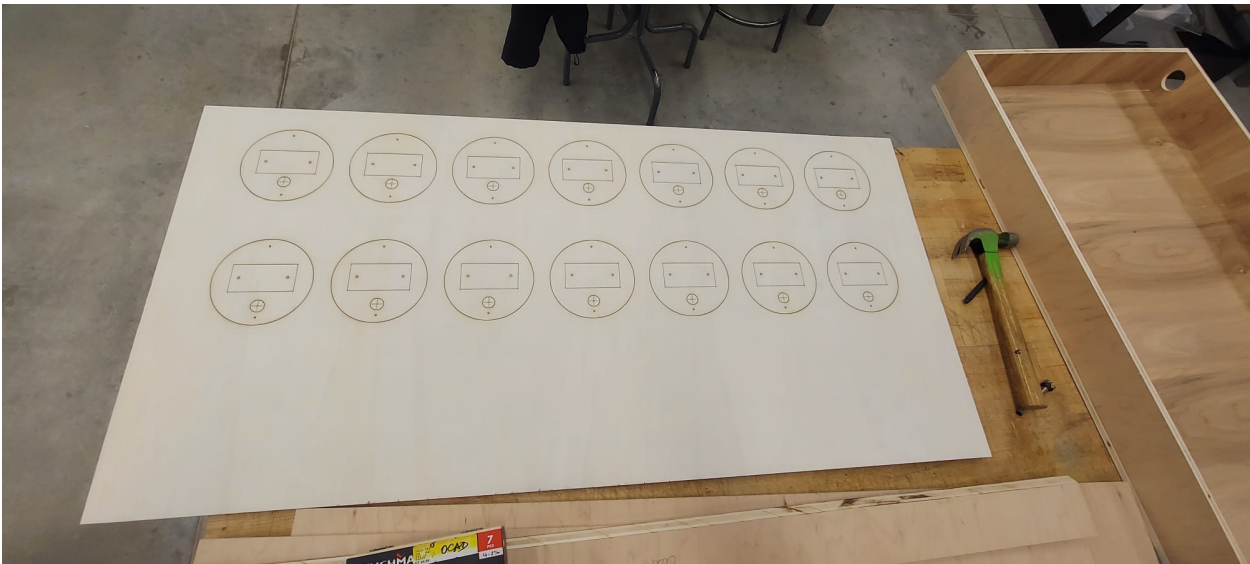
Final prototype lid for the box with engraving for measurement and position purpose
